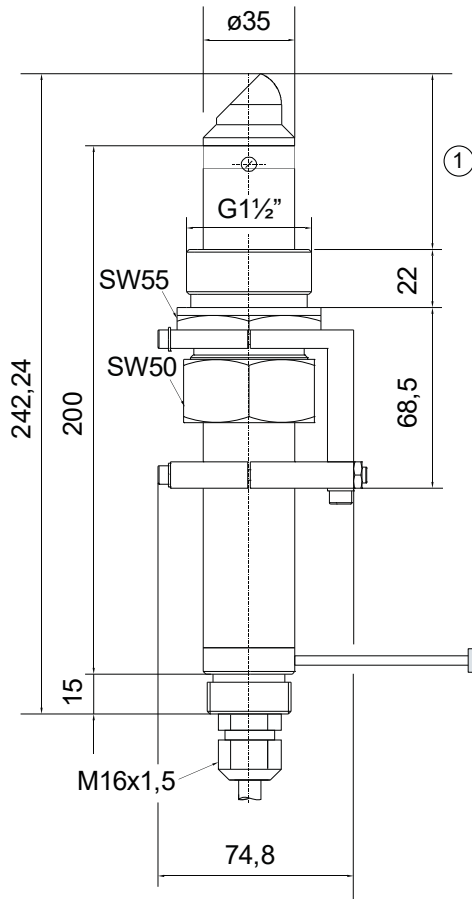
Dimensions plug-in sensor type NOS-V2S00
